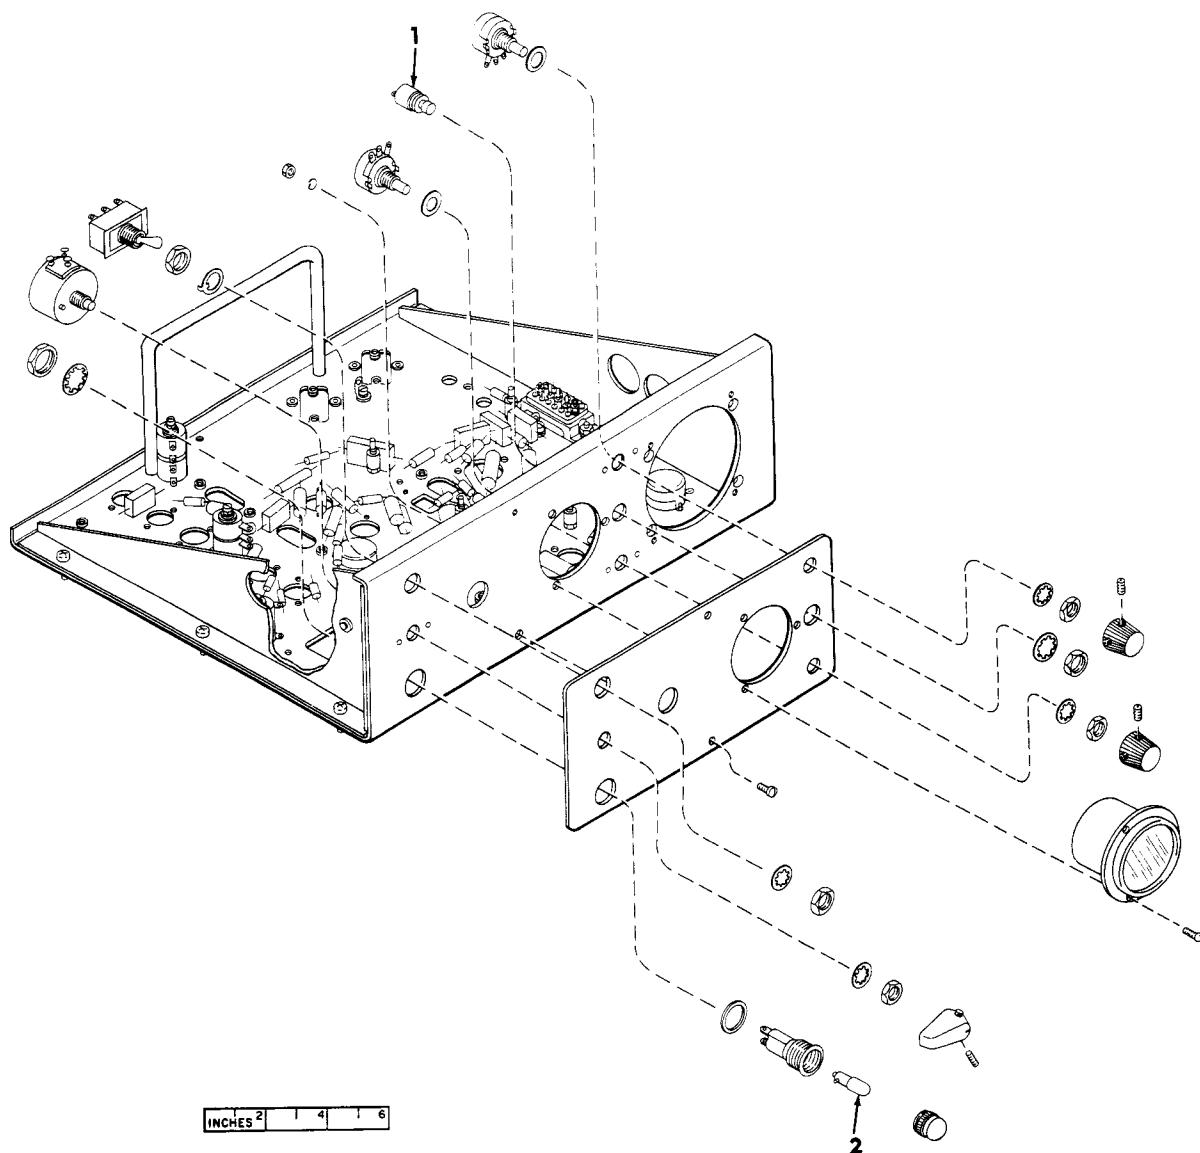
Oscilloscope OS-49/M (8007722)—partial exploded view
